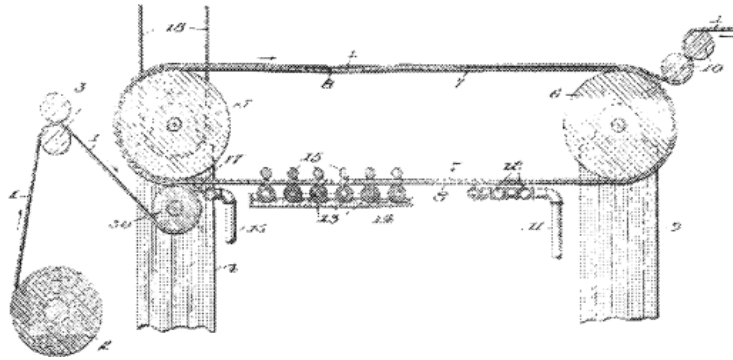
1925 Flexible Printing Machine (Gomez, 2000, p. 10)
